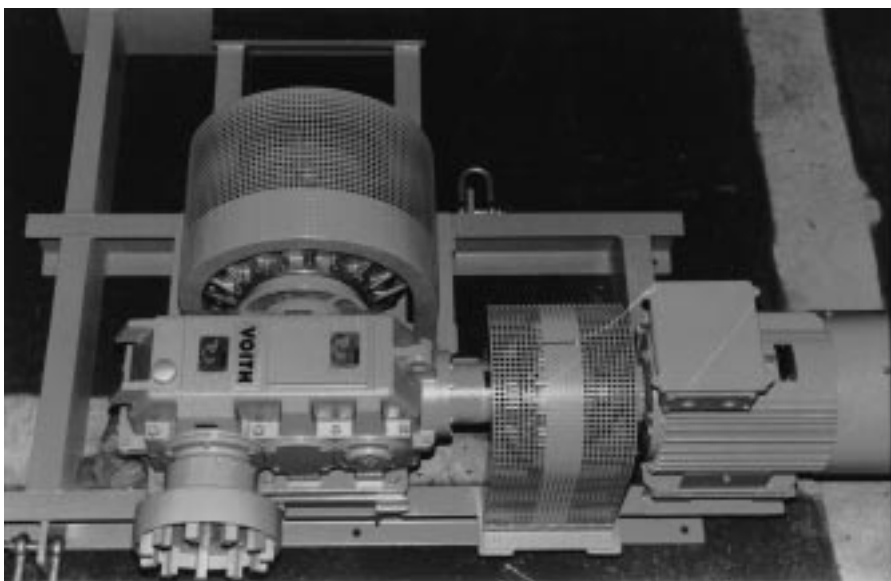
Three-stage straight bevel gear driving a stone crusher, VOITH
